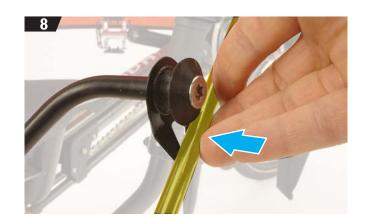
Guide the coupling plate of the Foldable Fairing into the U-tube from above.
